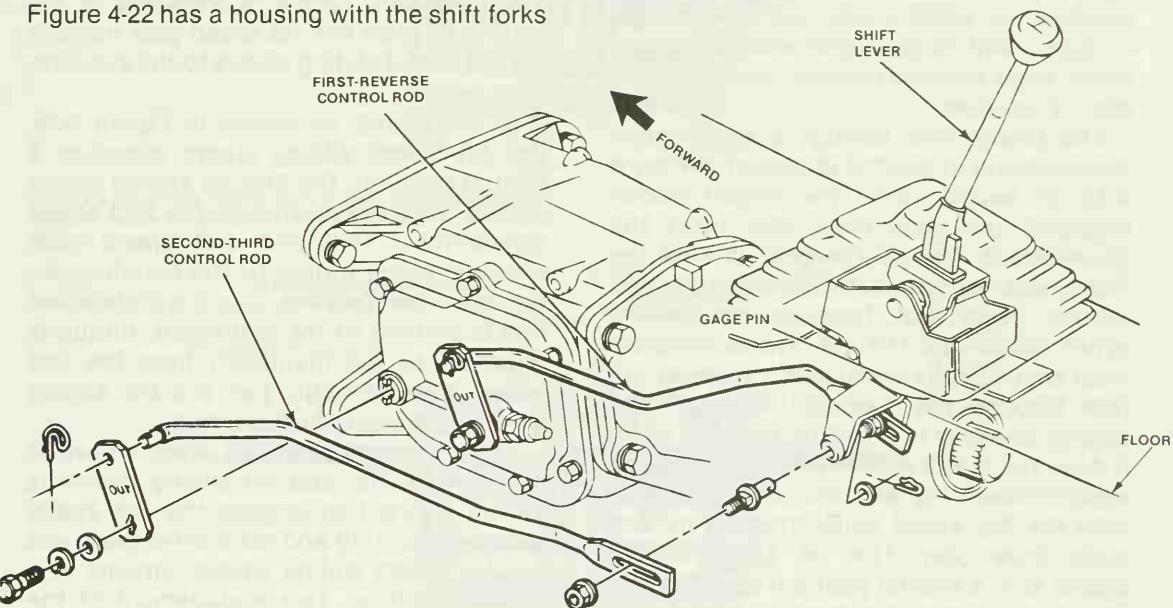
Floor-mounted shift linkage with control rods to the transmission. (Chevrolet Motor Division of General Motors Corporation)
